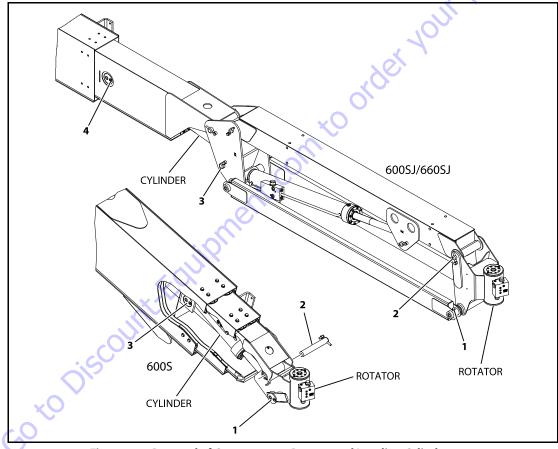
Removal of Components - Rotator and Leveling Cylinder
